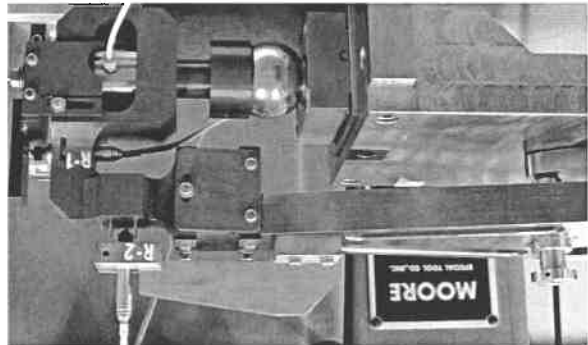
Close-up view of the RAFG of PAAF. A linear air bearing with a conical cup seats on the ball. The null position was found by slight rotation of the arm.
